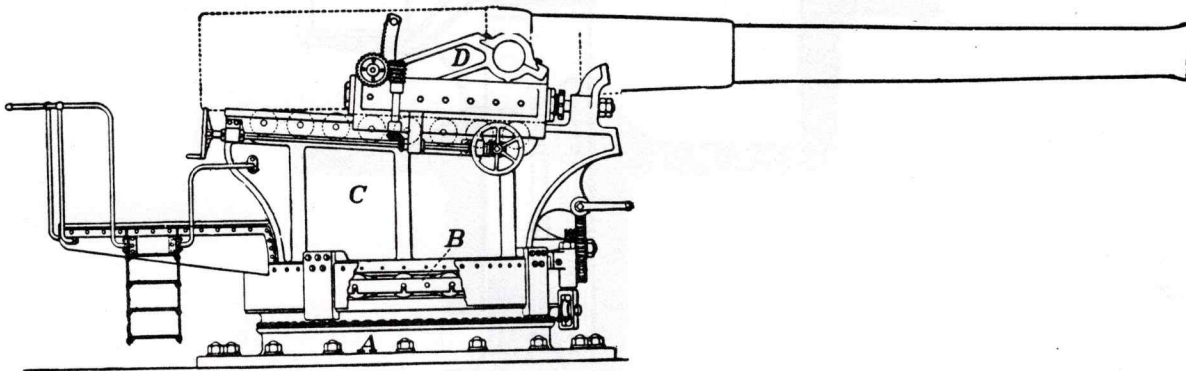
Pedestal Mount for 6-inch Gun, Shield Removed.
